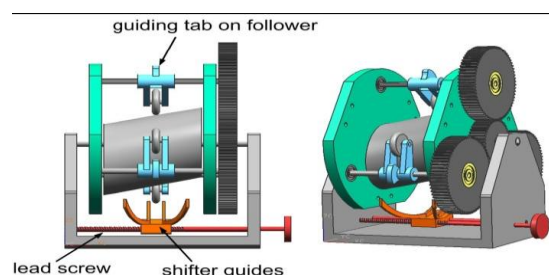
The front and isometric view of a concept transmission showing the shifting mechanism.
